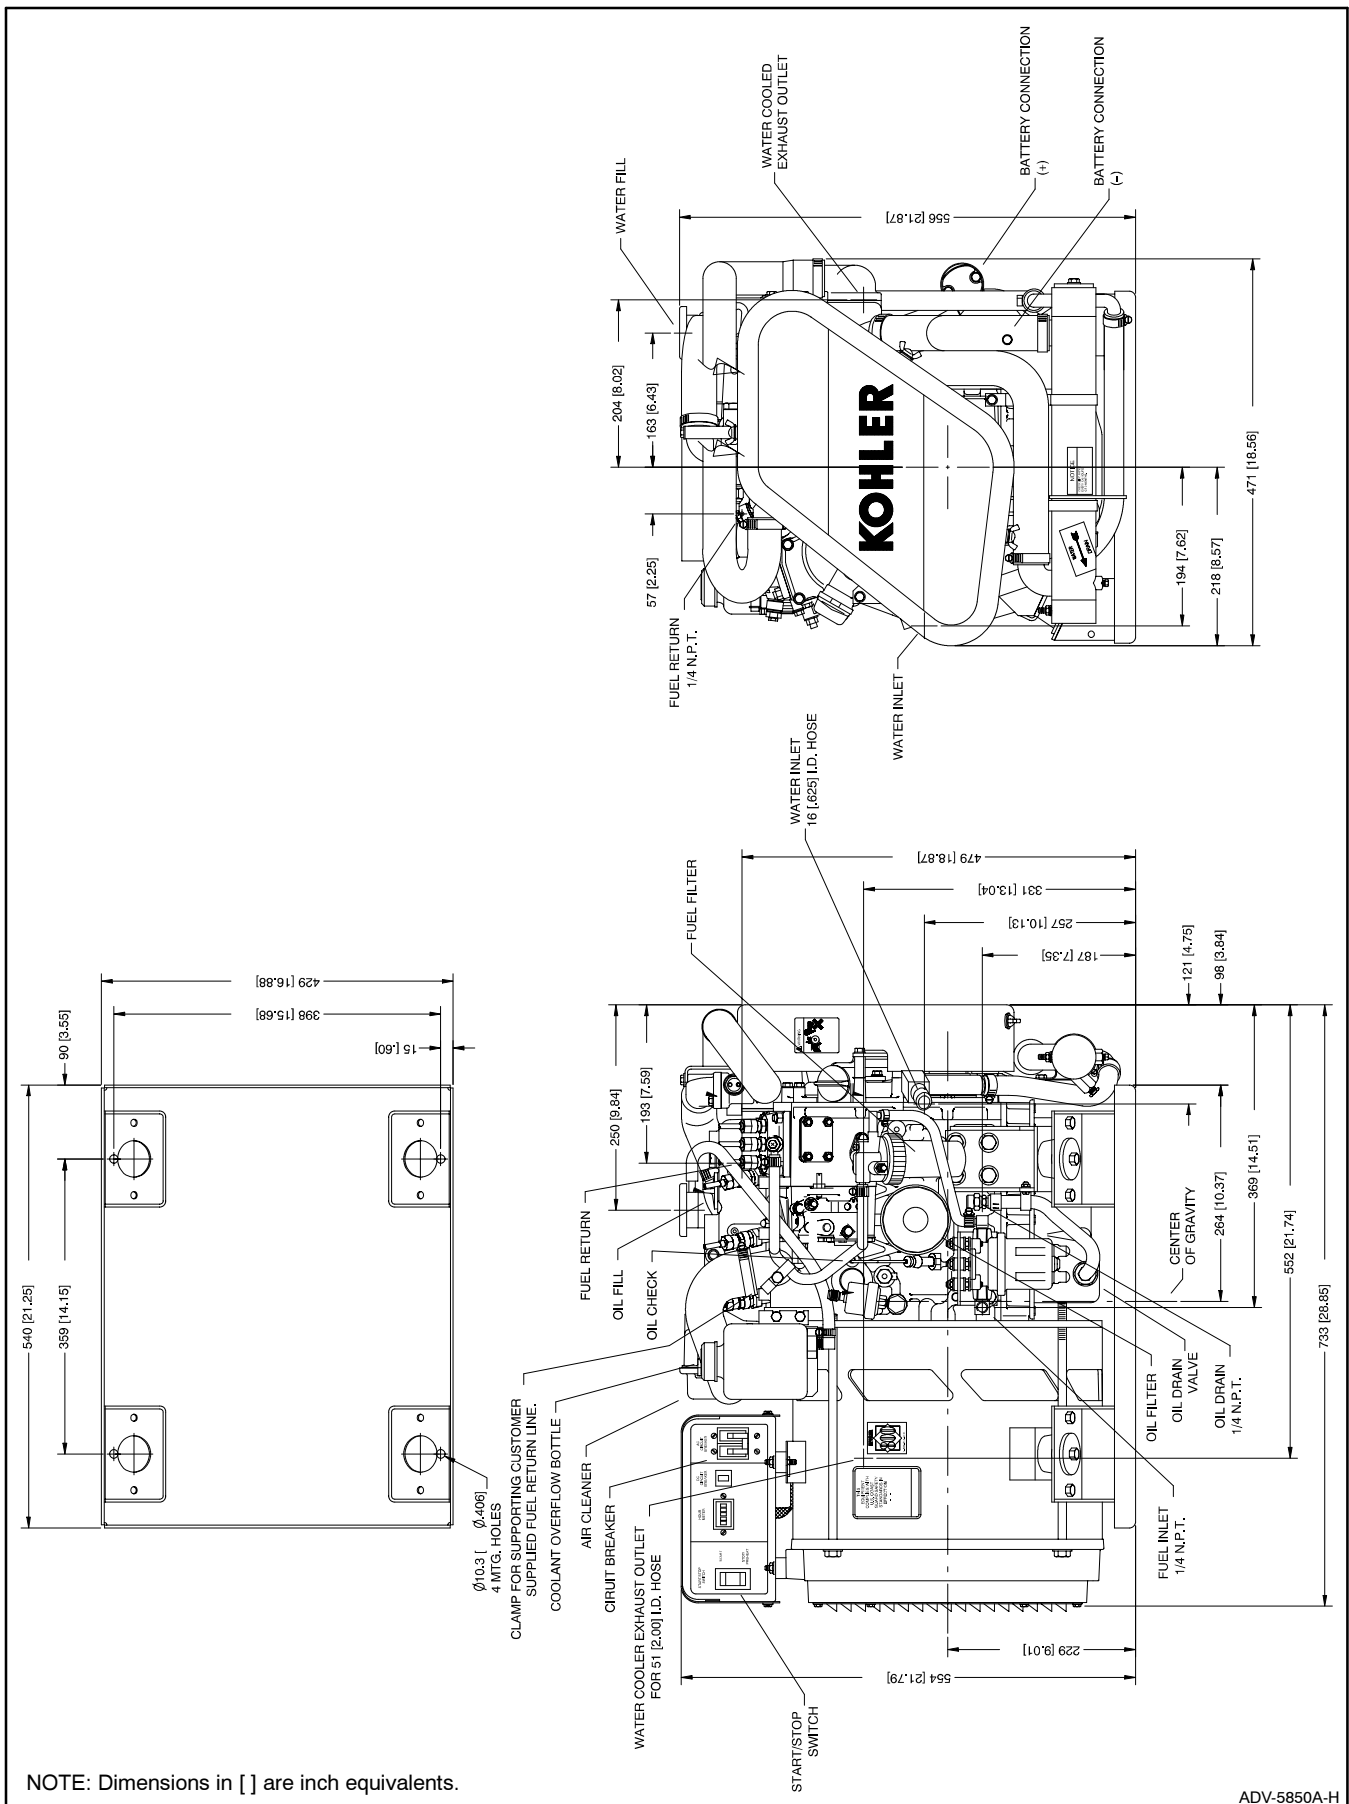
Dimension Drawing, 4EFOZ/5EOZ
